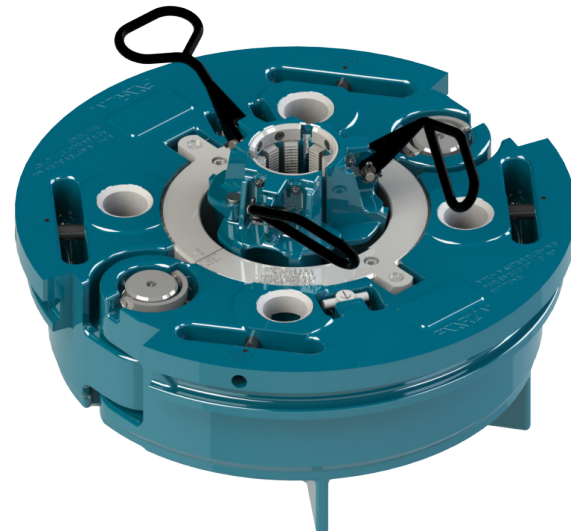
Insert Bowl in conjunction with a Master Bushing and a Hand Slips
